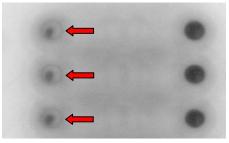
X-ray image of through-hole component with insufficient barrel solder fill
